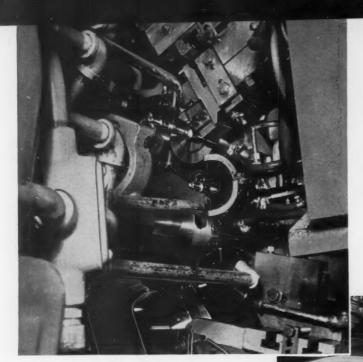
(Left) Induction heating head, seen at the right center, is mounted on cross-slide of this automatic bar machine to harden shaft.
